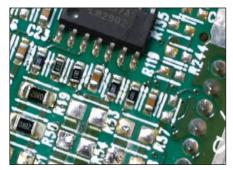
The board should look like this. Two 0603 size resistors have been removed, and the cleaned board is ready to receive two new resistors.
